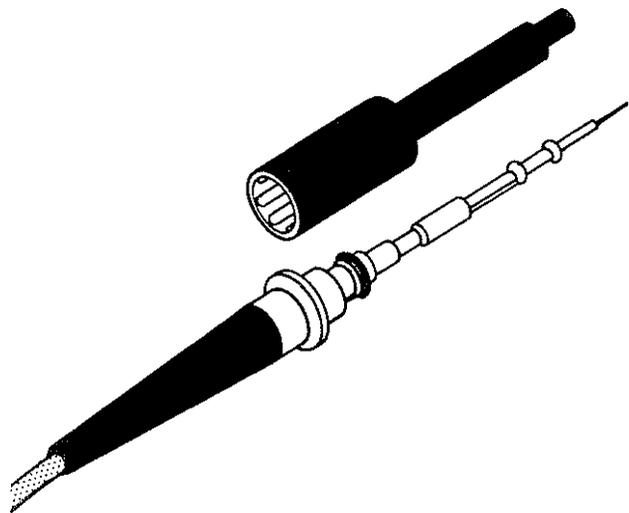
The new style probe body can be distinguished from the old style by noting the six raised ribs inside the end near the threads.
